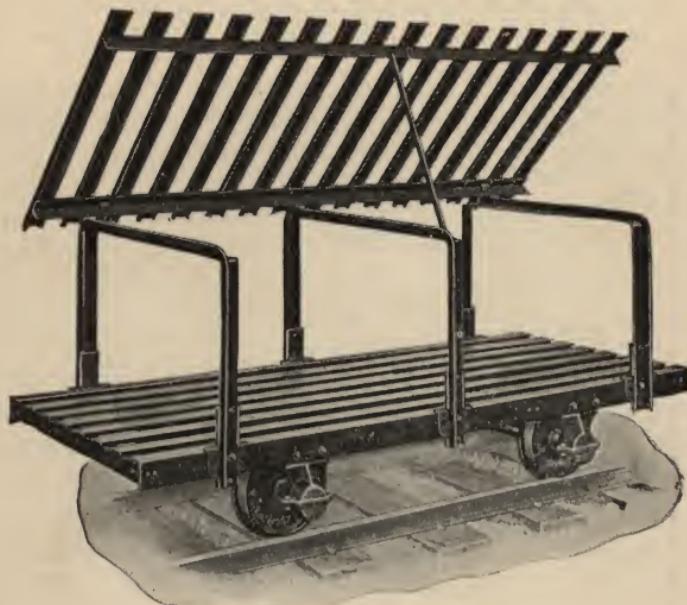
,823.—International dryer car. *It has* steel decks and three uprights, used to carry brick drainage tile, and hollow brick.
